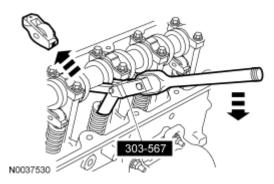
Removing Camshaft Roller Followers Courtesy of FORD MOTOR CO.
